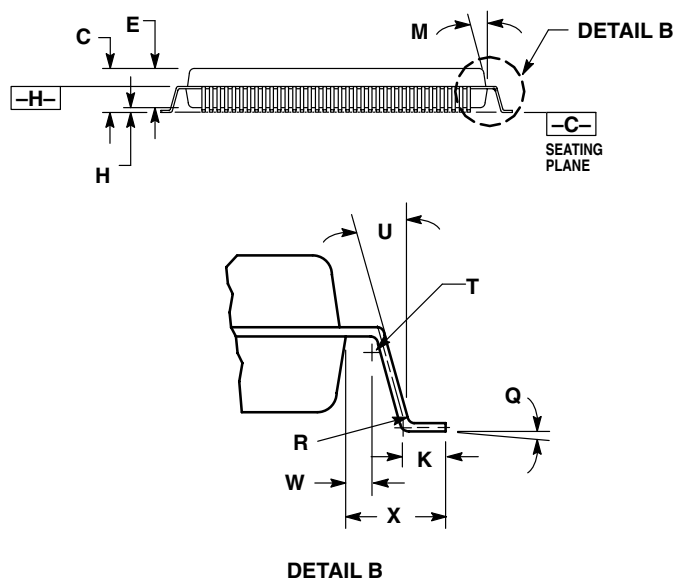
132-Pin Package Dimensions —Case 831A-01
